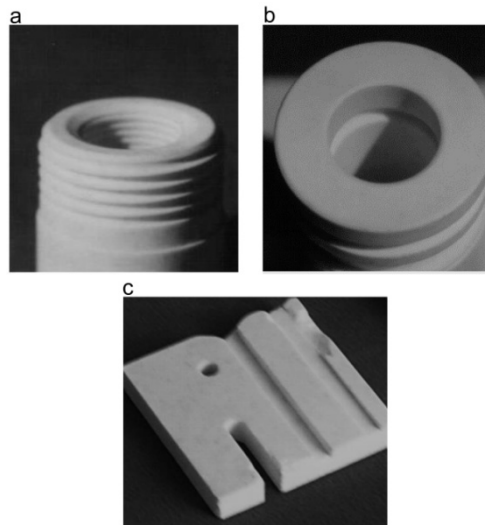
Sintered machined green compacts prepared with MMA: a) outer and inner standard metric screw thread made by turning, b) outer and inner rectangular profile groove made by turning and c) pockets, groove and hole made by milling.
